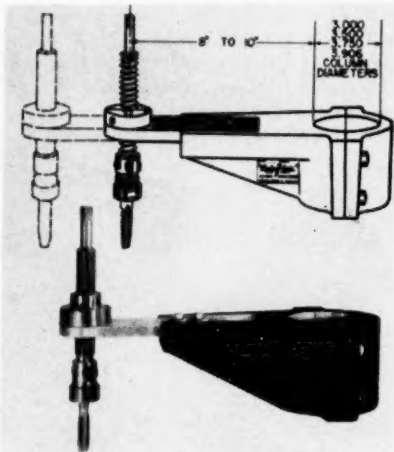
Illustration showing 500 Series Support Arm for "Auto-tap" Lead Screw Tapping Attachment
